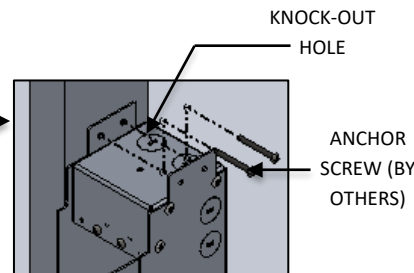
DETAIL SHOWNG KNOCK-OUT HOLE AND SCREWS
